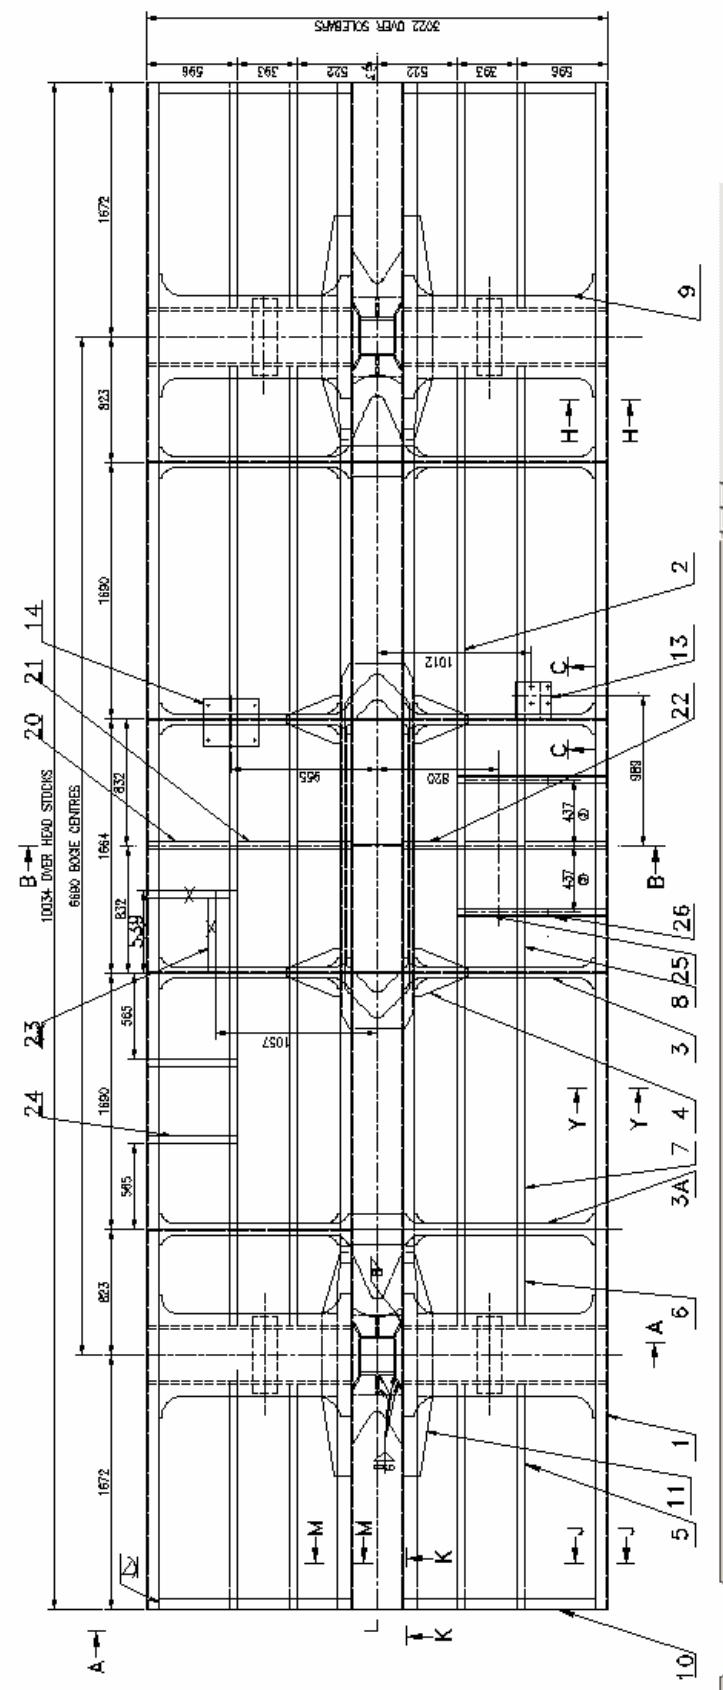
BOGIE OPEN WAGON TYPE 'BOXNHL' UNDERFRAME ARRANGEMENT
